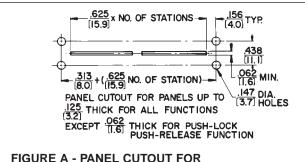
FIGURE A - PANEL CUTOUT FOR PLUNGER CLEARANCE ONLY
